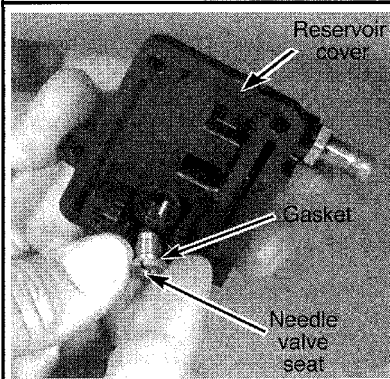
Install the needle valve (using a new gasket, if equipped)
